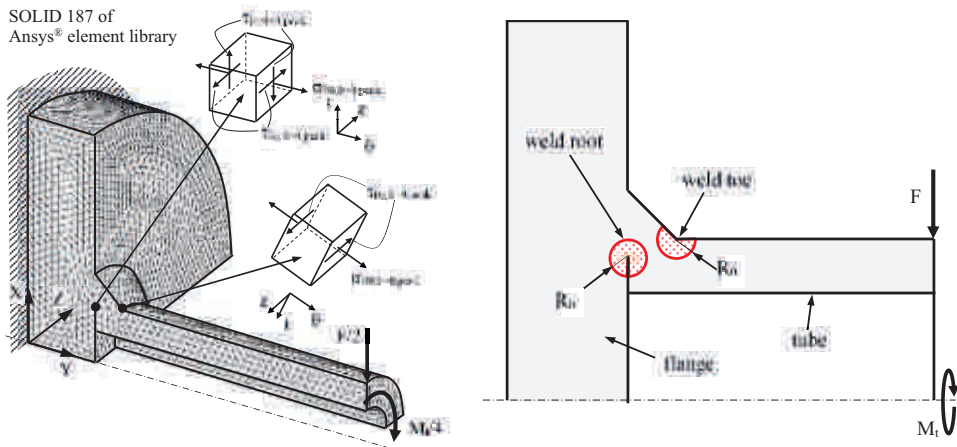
FE models to apply the PSM according for a partial-penetration tube-to-flange welded joint under combined bending and torsion loading using 3D 10-node tetra elements.
